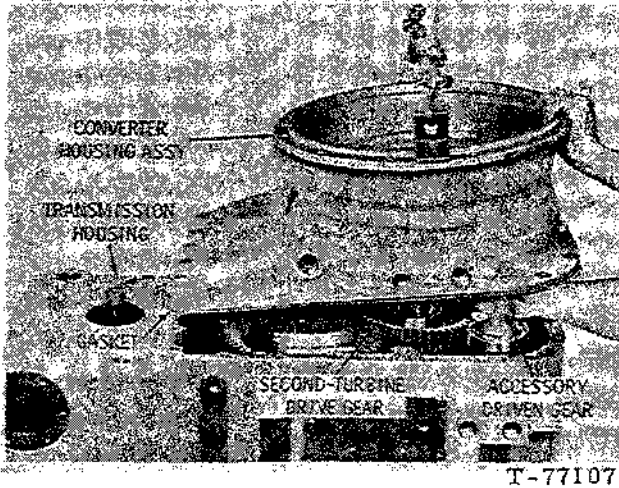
INSTALLING TORQUE CONVERTER HOUSING ASSEMBLY
